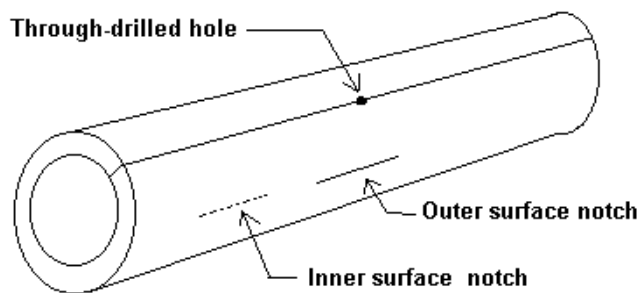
Seam Weld Inspection Reference Standard
